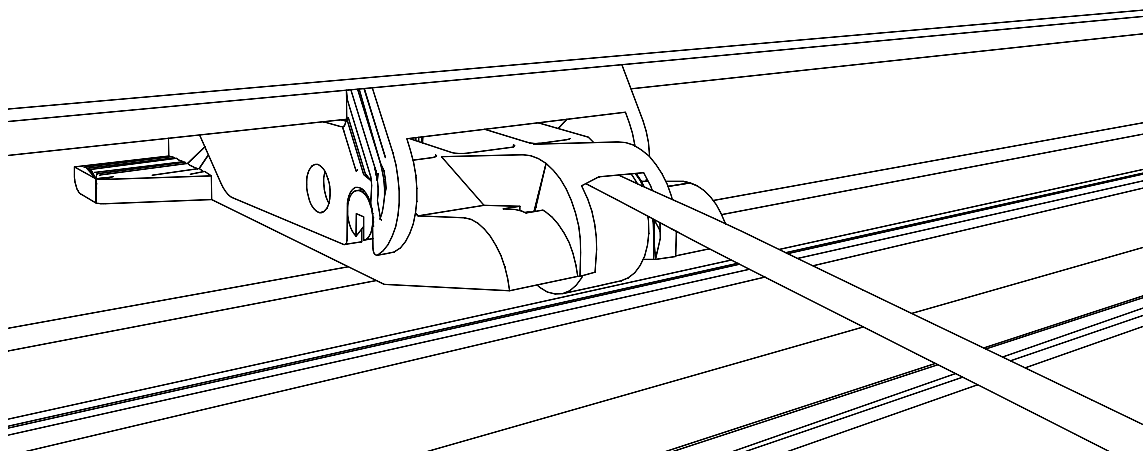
Placement of the flat head screwdriver on the wheel for removal.
